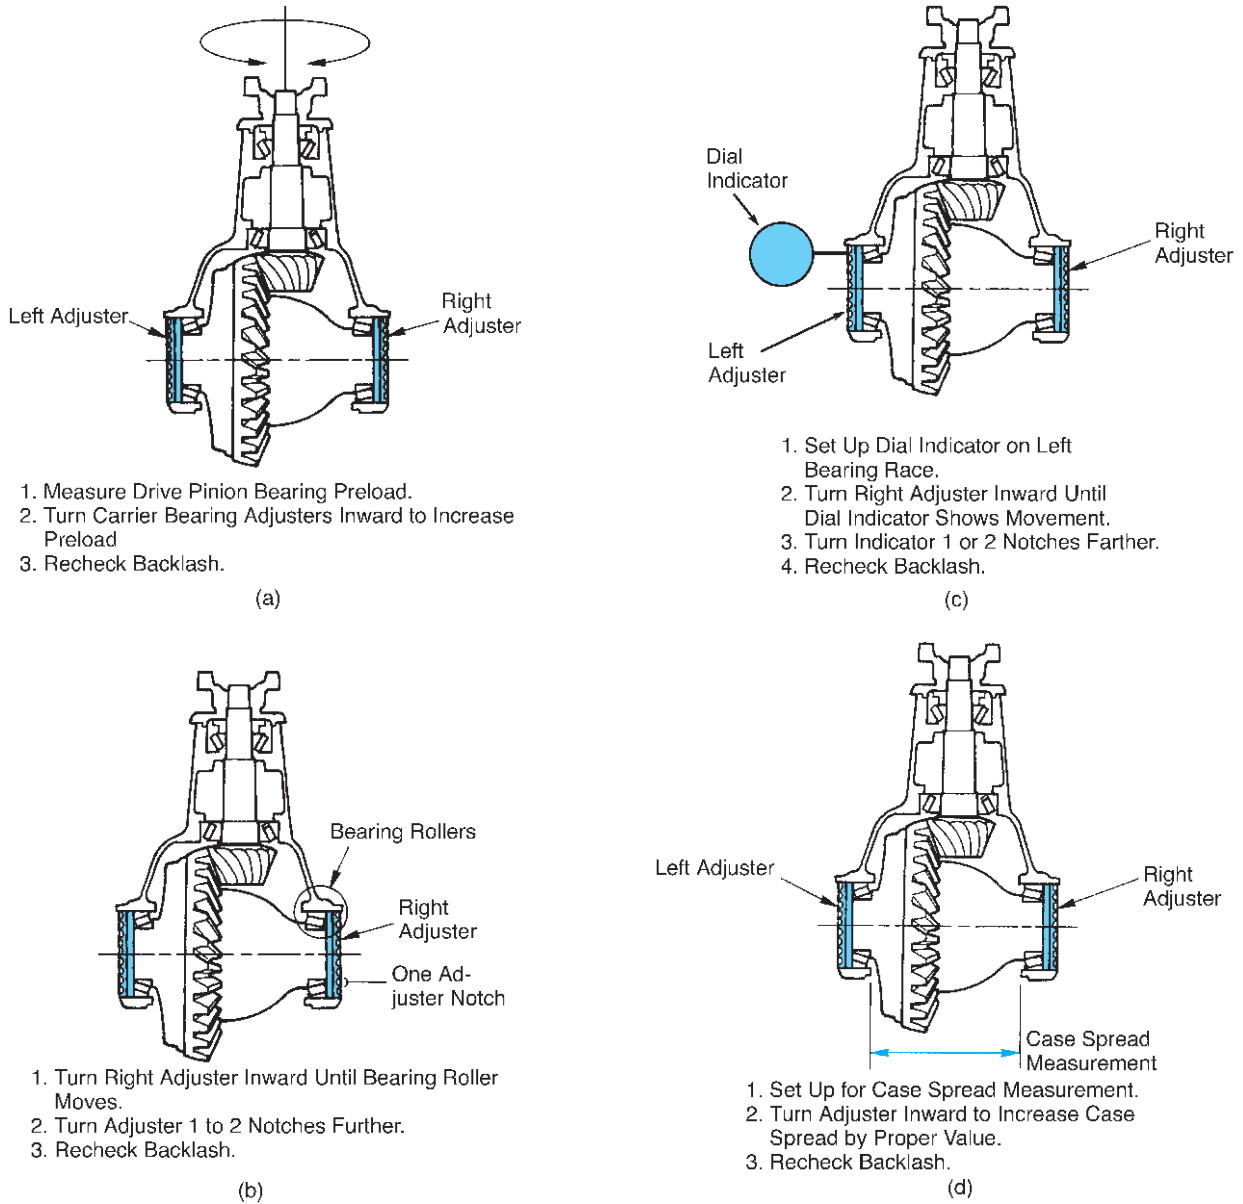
Four methods of adjusting carrier bearing preload. Note that once the bearings are preloaded properly, the adjusters must be turned in equal but opposite motions if backlash must be readjusted.
